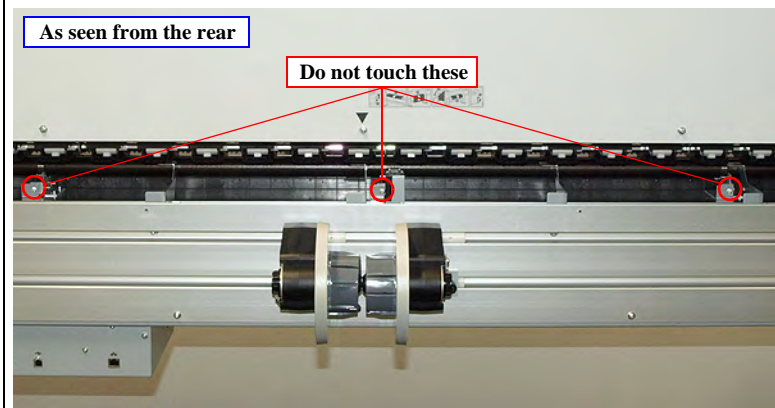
Removing the screws of REAR PAPER GUIDE
